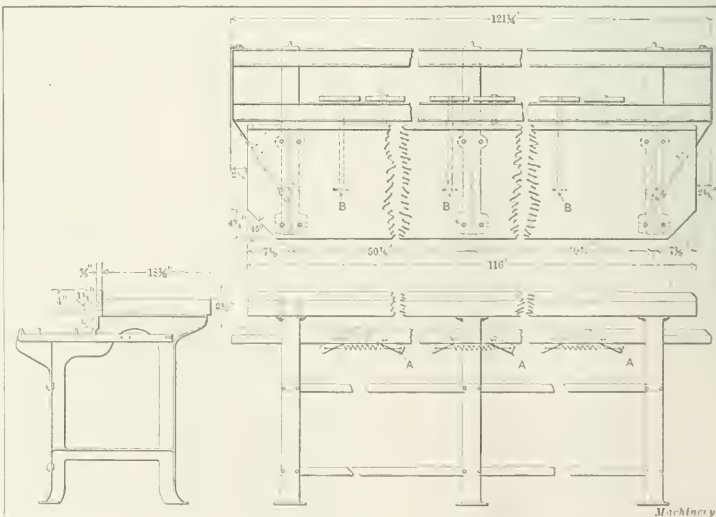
Design of Shaft Assembling Bench—note Locking Device for holding Bench Trucks in Place
